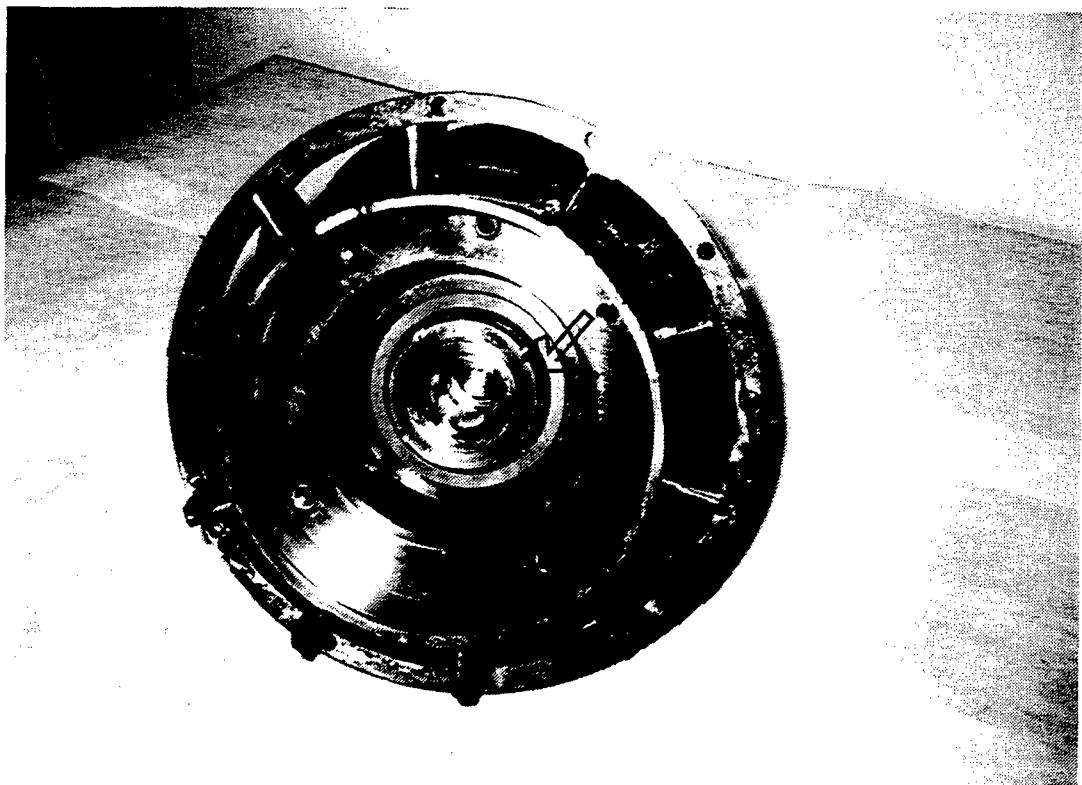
The CCN-150 pump shaft is supported by a heavy duty ball bearing at the motor end.
